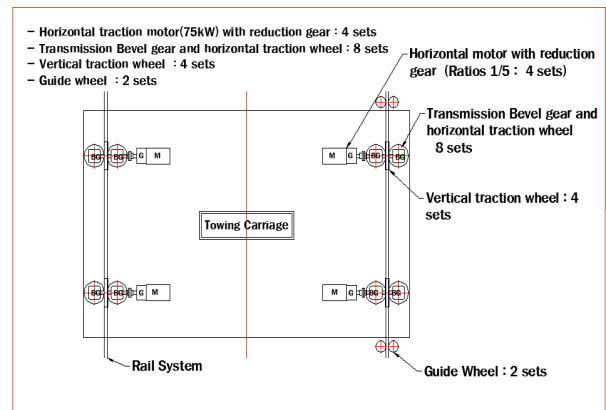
Arrangement of single horizontal geared motor driven horizontal traction wheel system
